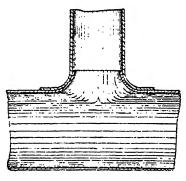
and 332 show outside and sectional views of the way in which an outlet may be brazed on to a pipe. The
